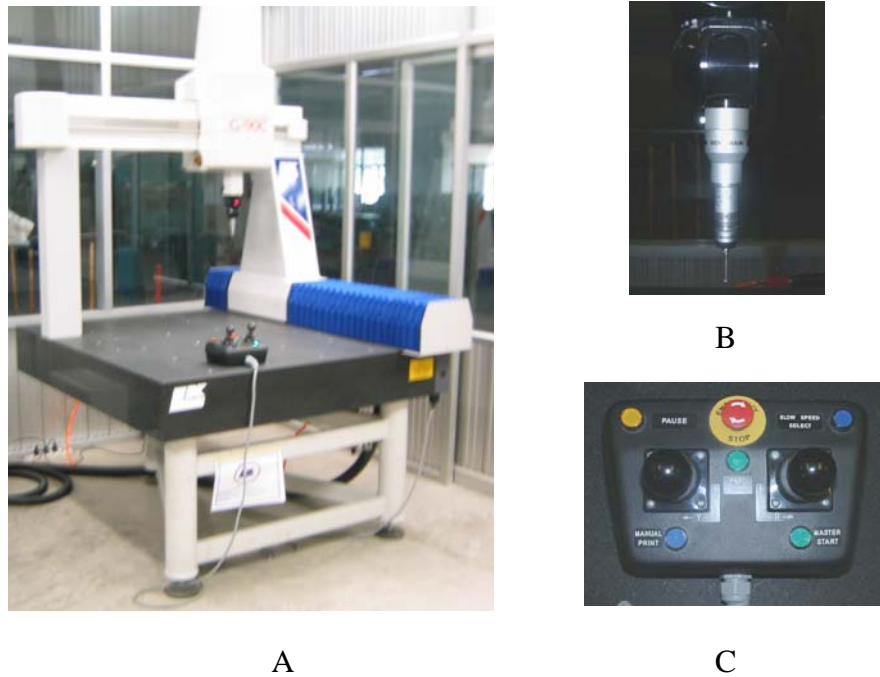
The coordinate measuring machine(CMM): A) CMM (LK G-90C), B) Touch trigger probe, C) A hand stick was used to control the direction of trigger probe.
